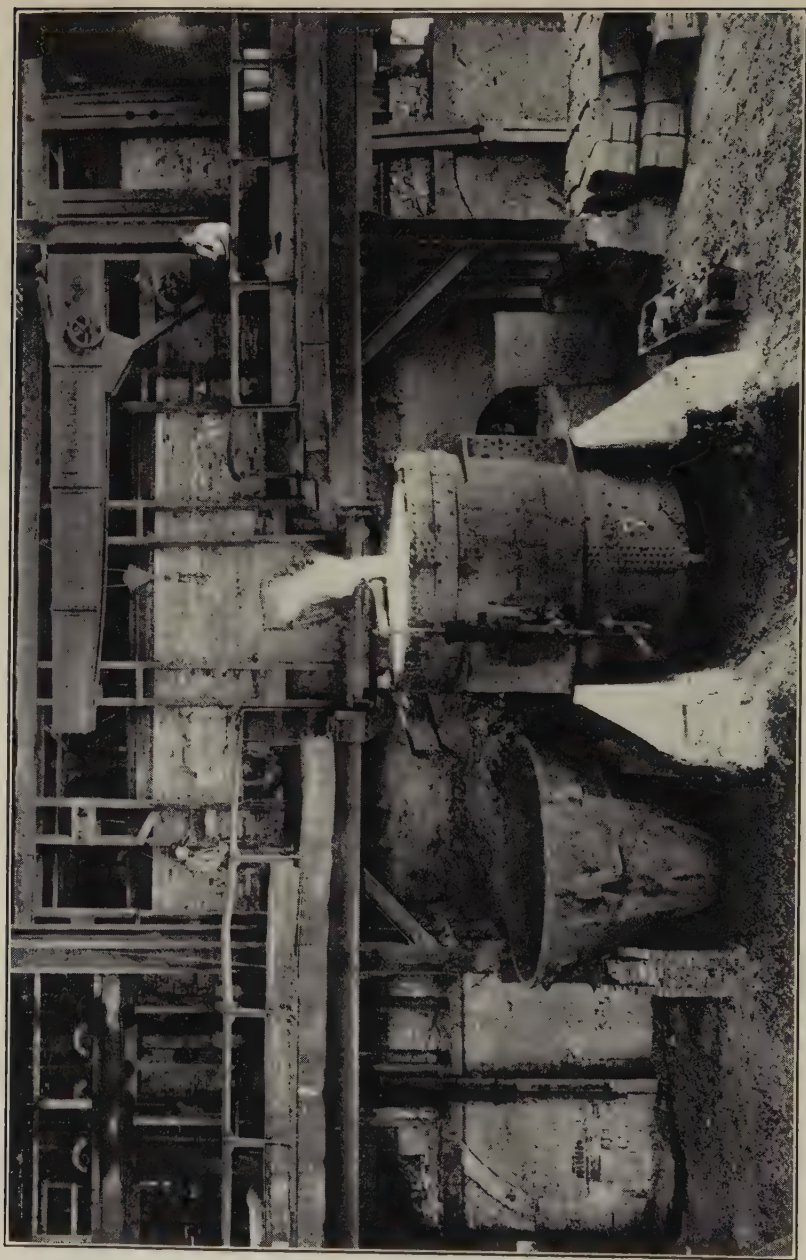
Pouring Side of an Open-Hearth Furnace.—Courtesy of Bethlehem Steel Co.
